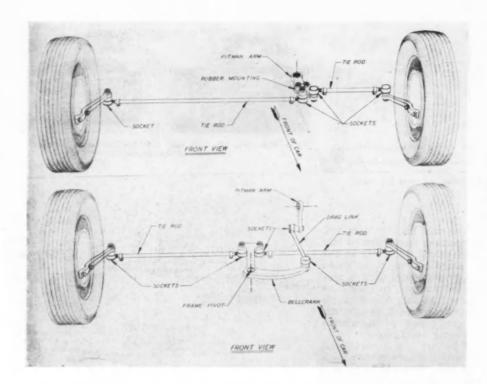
Two types of steering linkage. Upper view shows long-short arm linkage. Lower view shows center arm steering linkage with bell crank intermediate arm
